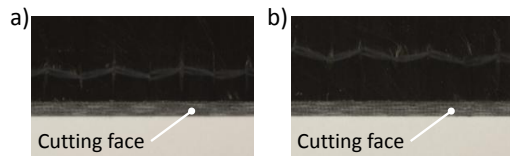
Cutting face of the workpiece, a) for planar clamping; b) for linear clamping at the middle of the cutting length $l_{y,l} = 225$ mm
